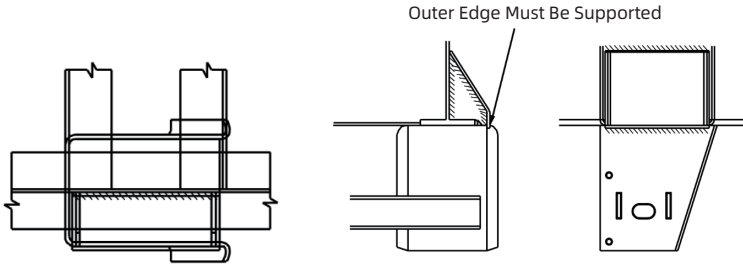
Bracket Welding Method at Frame Center (Wing-Type or Non-Wing Type)
